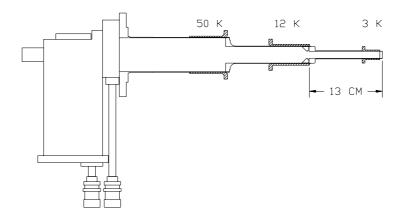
The BIMA cryocooler. A third stage is welded to the end of a standard CTI model 1020 refrigerator.
